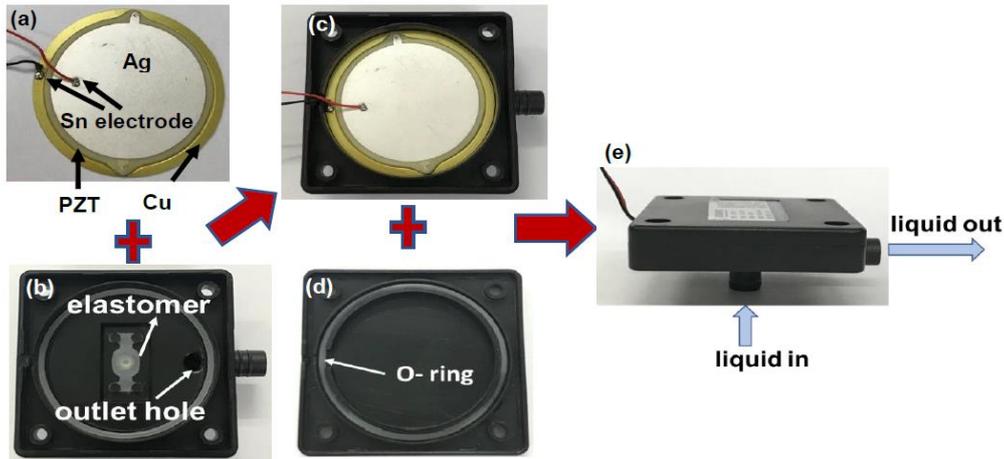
Pictures of the parts of a PZT pump : (a) A PZT oscillator (b) Bottom part (c) A PZT oscillator in the bottom part (d) Top part (e) A forming PZT pump.
